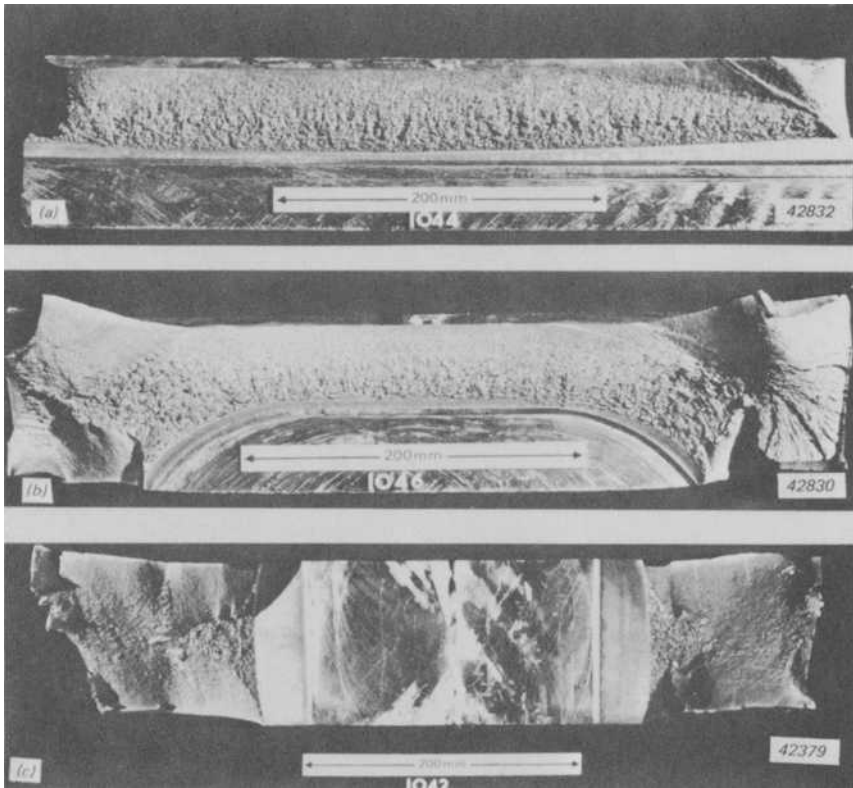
Wide plate fracture surfaces (a) surface notch, (b) semi-elliptical, and (c) center cracked.
